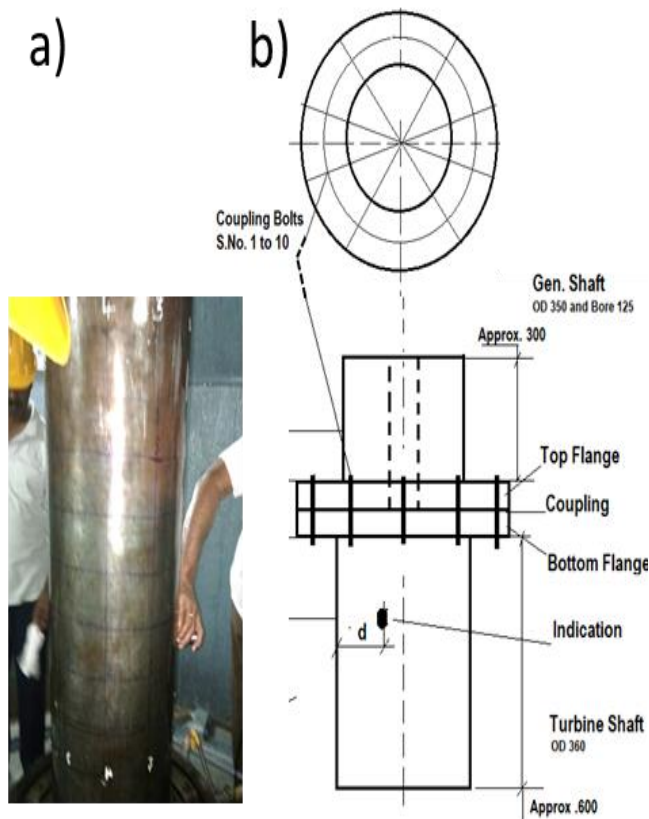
Patching made on the turbine-generator shaft for UT-Bscan imaging and the locations of bolting joints
